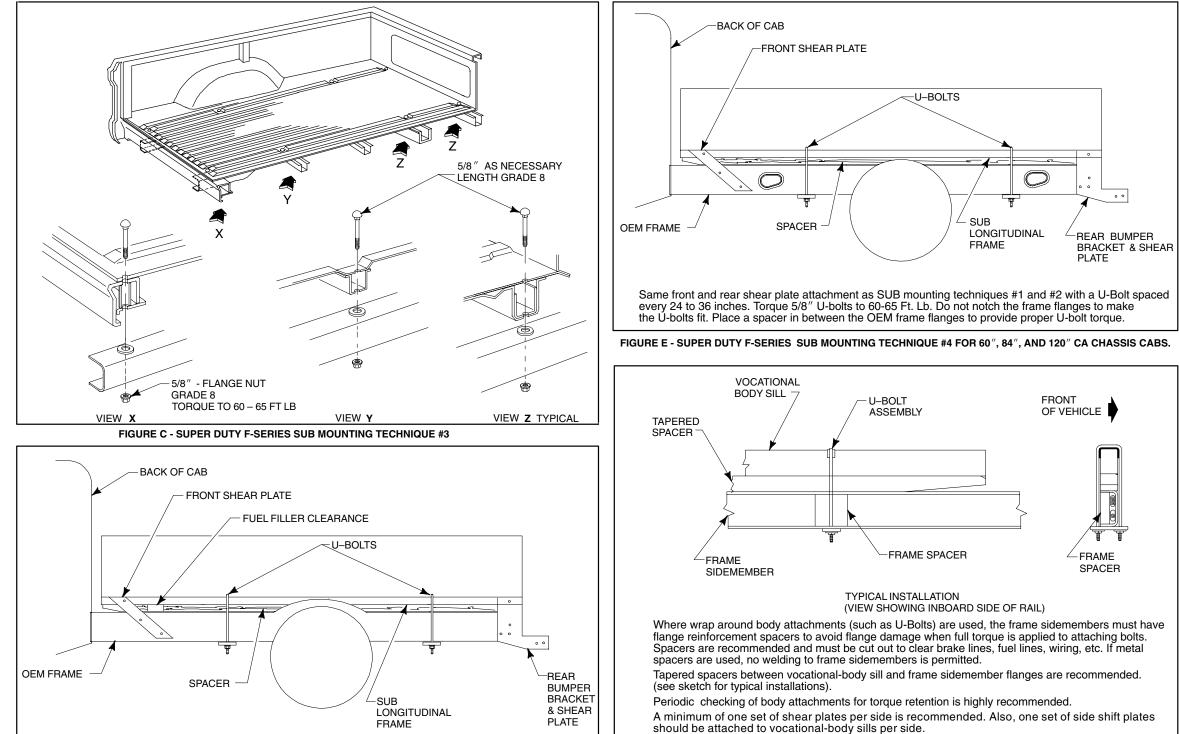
FIGURE D - SUPER DUTY F-SERIES SUB MOUNTING TECHNIQUE #4
